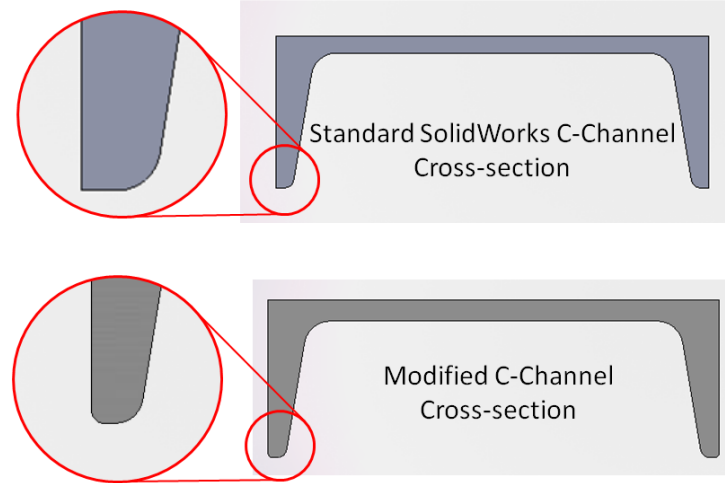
Geometrical Modification to C-Channel Cross-section
